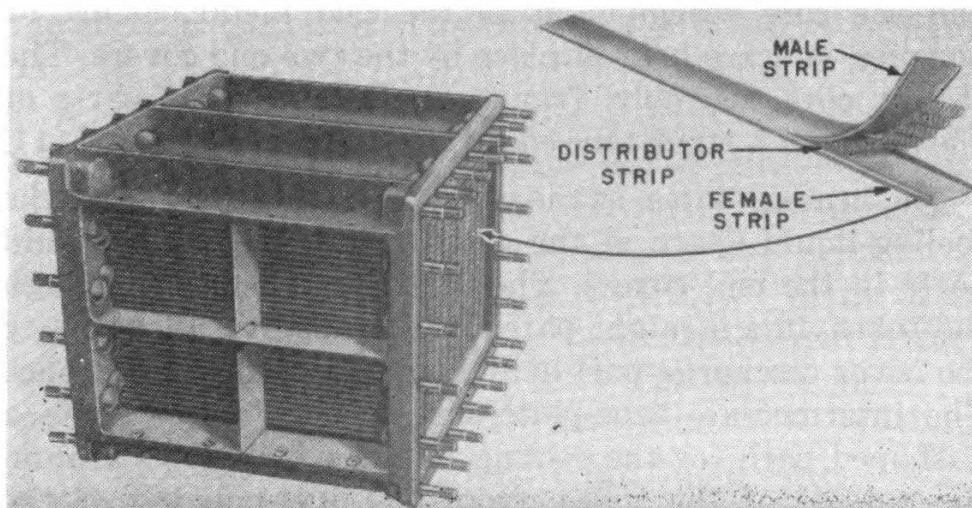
Tube assembly of a strut-tube lubricating-oil cooler (Harrison).
